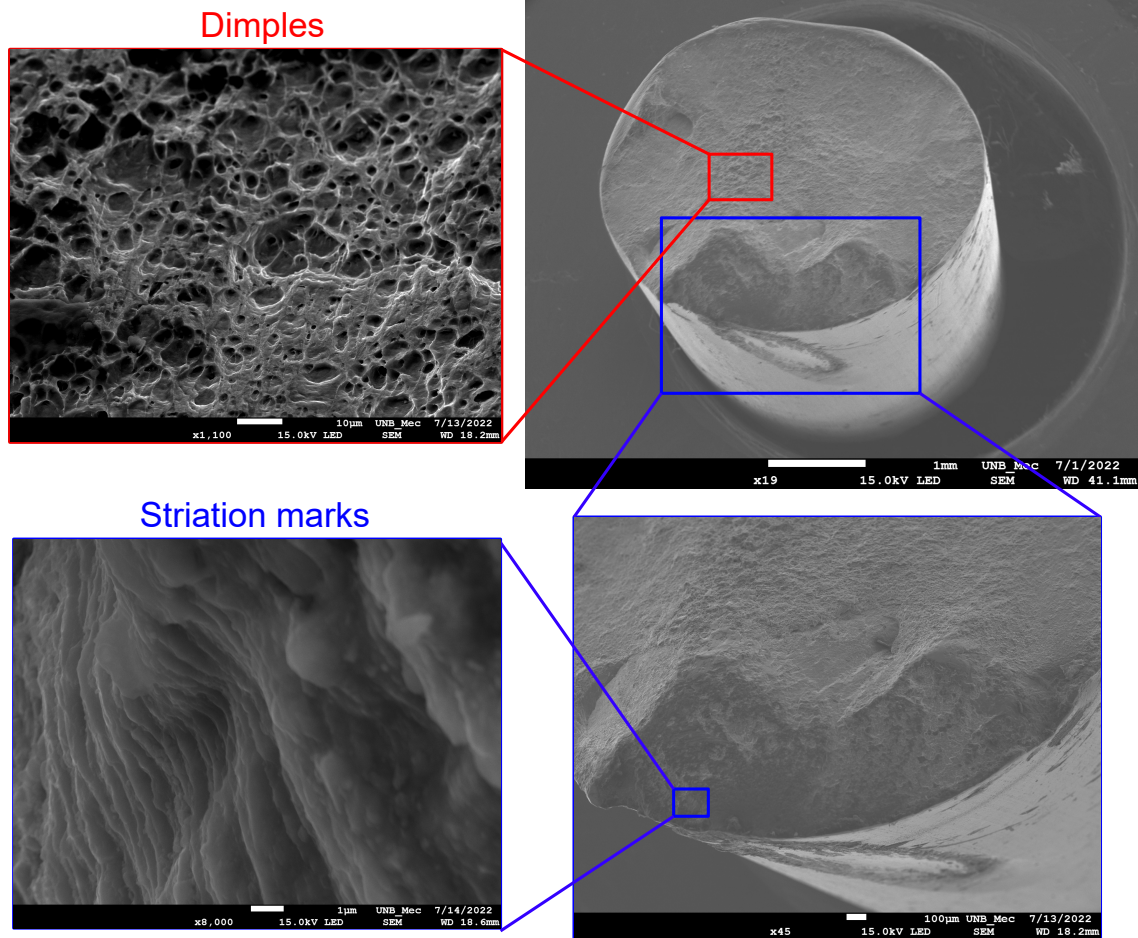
Microscopic features observed on the fracture surface of the fretting wire specimen F09 (refer to Table 3.3).
